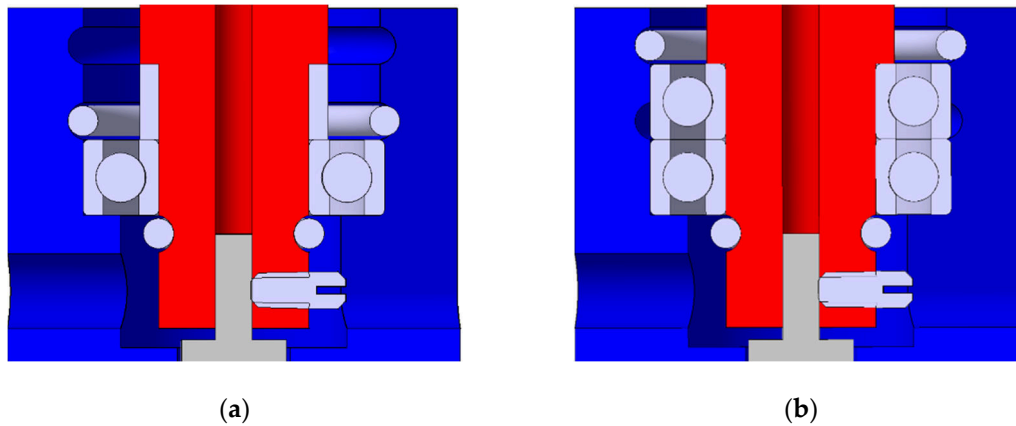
Bearings configuration. (a) One bearing is above the flywheel on the slip ring housing, one is below the flywheel where a spacer and snap rings are used for shouldering; (b) Both bearings are placed side to side below the flywheel, the spacer is removed (replaced by the second bearing) and the internal snap ring move on the higher groove.
